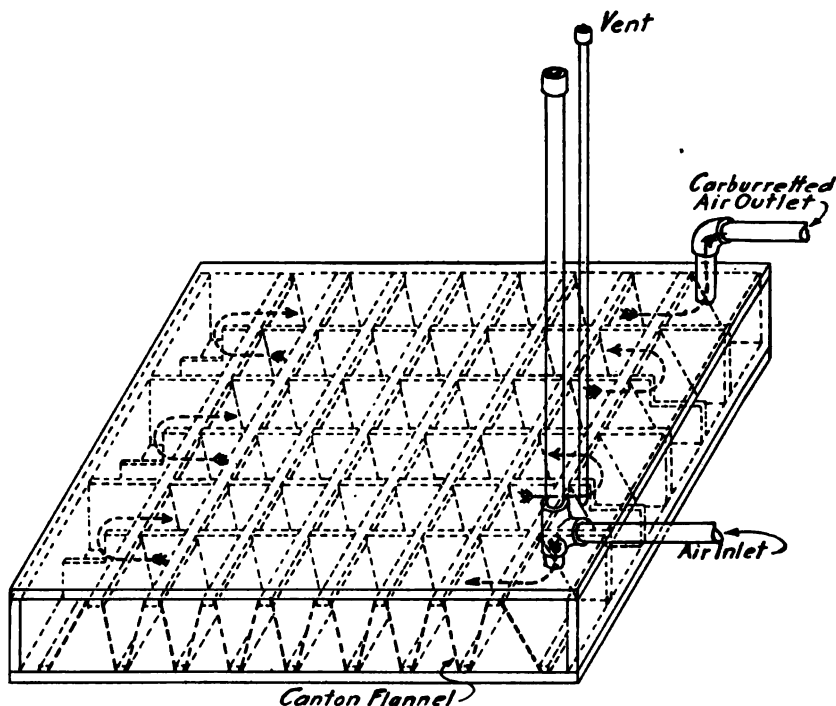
Carbureter, 50-Light Air Gas Machine.
